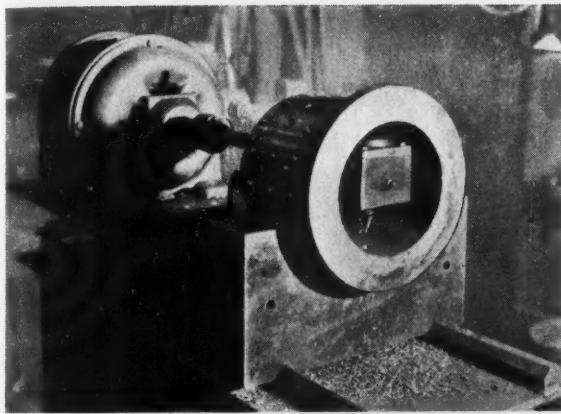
Special machine devised for countersinking the inner ends of grease holes in floating bushings. Simple, but efficient.
